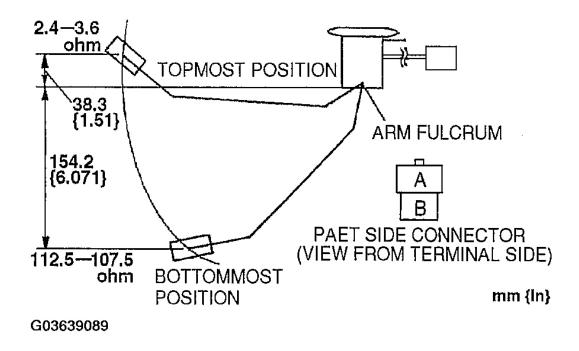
Inspecting Fuel Gauge Sender Unit Courtesy of MAZDA MOTORS CORP.
